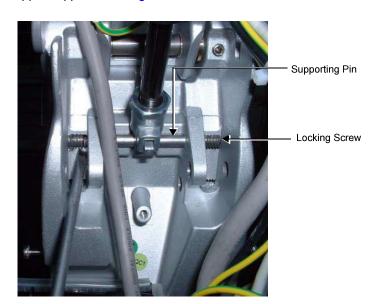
Lower Section of Gas Spring showing Connecting Pin and Locking Screws
